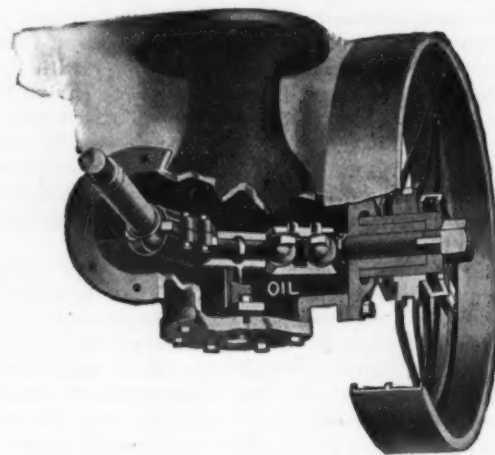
A Broken Section Showing the Ball Jointed Shaft.
